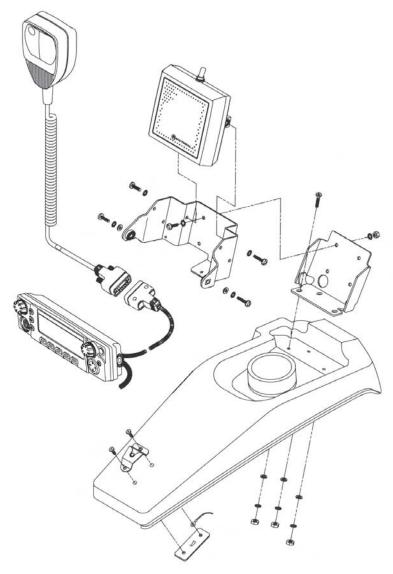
Fuel Tank Console Installation with Speaker and Control Head Mounted Together
